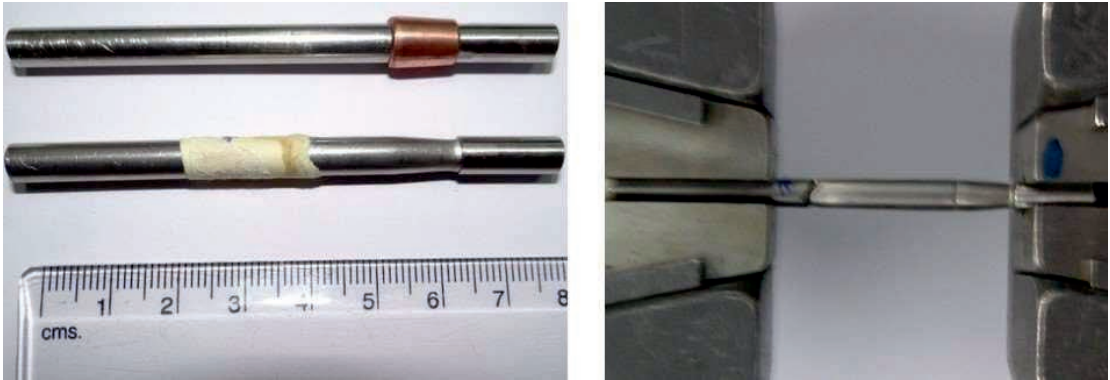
(a). MP Welded Joint have special plug design for Pull Out test enable and
